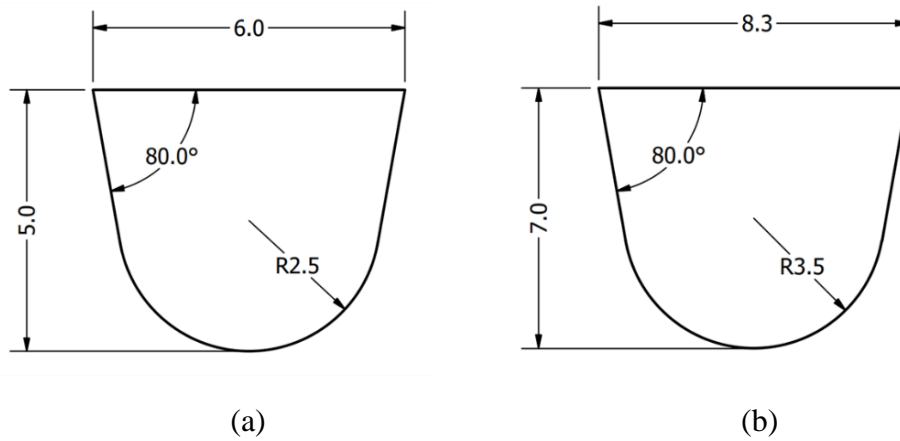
Runner dimensions, (a) Thin runner, (b) Thick runner
